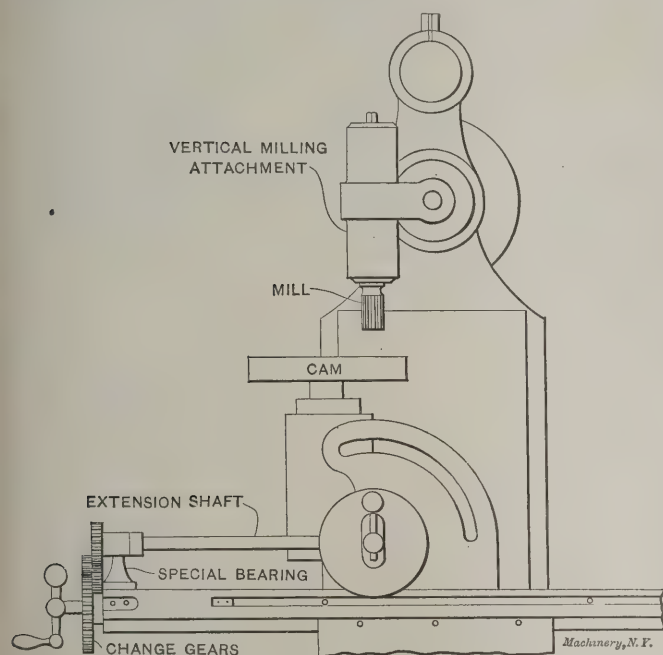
Cutting a Face Cam of Uniform Rate of Throw.
